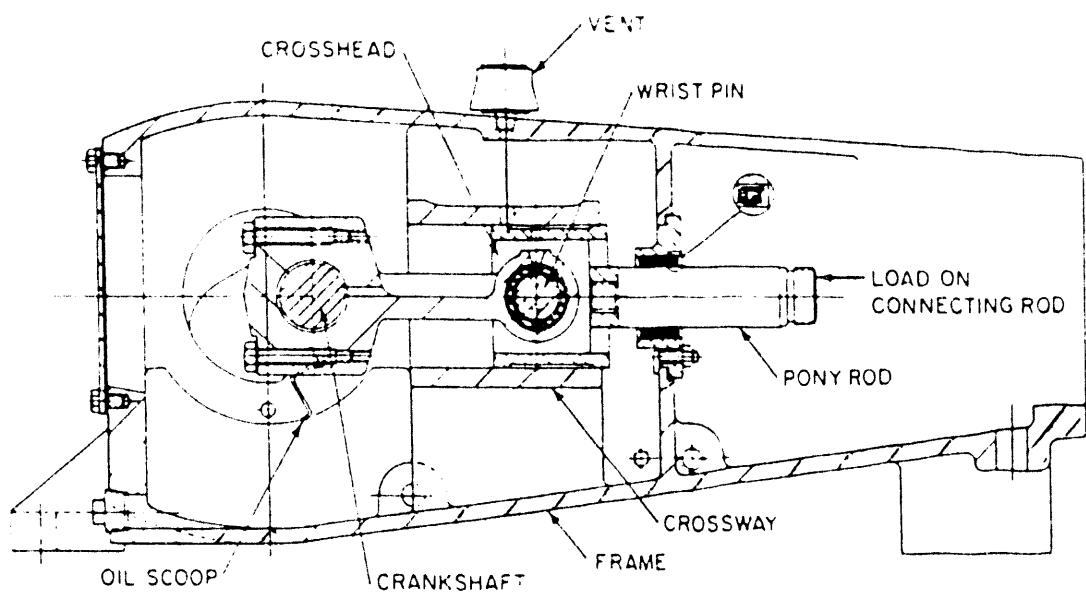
Power End — Reciprocating Pump.[3.7]
